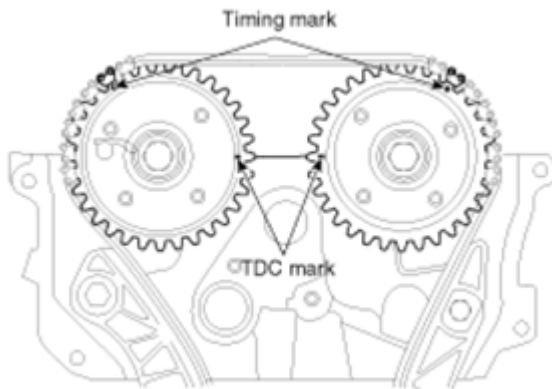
Identifying Camshaft Sprocket Timing Marks
